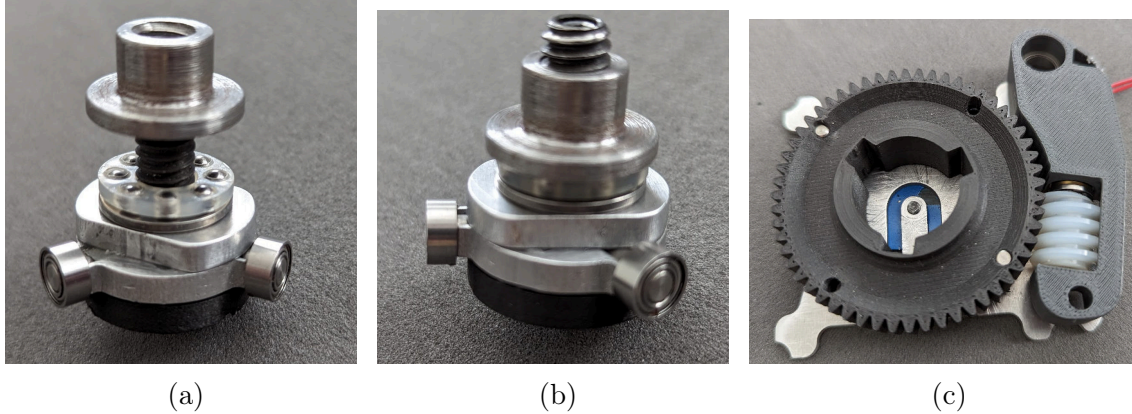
Images of the AutoBolt internal screw assembly, including the internal both in the retracted (a), and extended (b) positions. The third image (c) shows the 3D printed spline shaft, the cantilevered flexural spring, and a spring-loaded worm gear drive.
